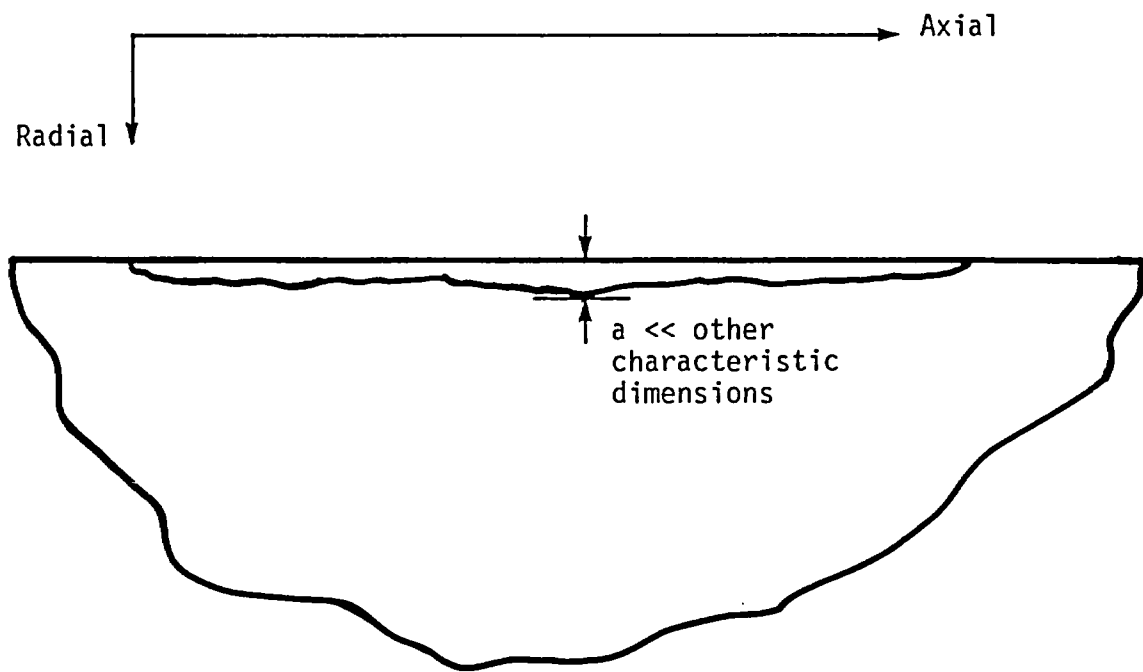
Schematic Representation of Example 1a, a Long Axial Surface Crack in the Bore of a Rotor.
